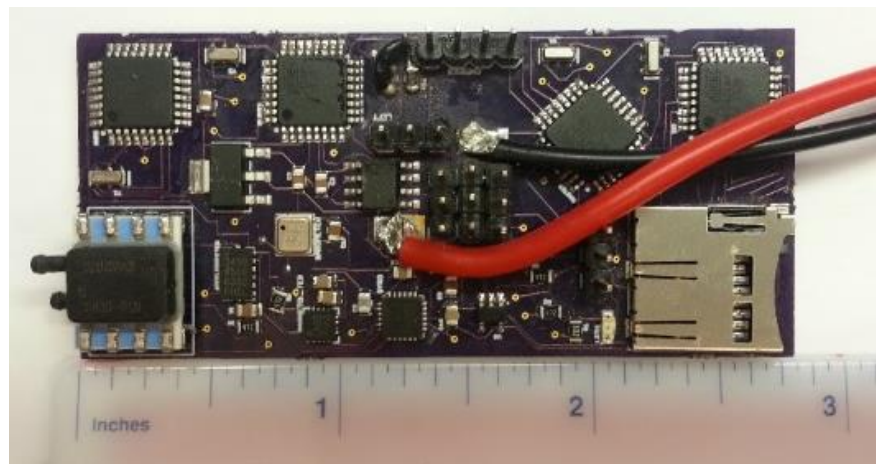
Custom PCB used in Robo Raven II flight tests
